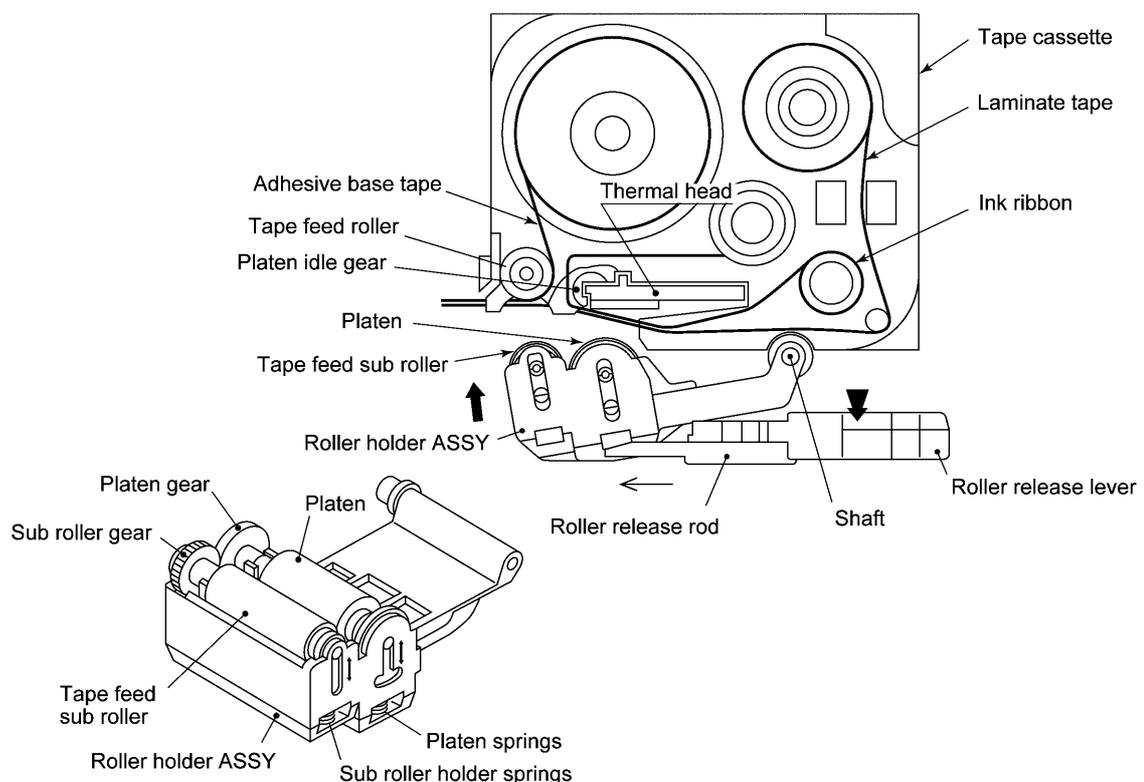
Roller Holder ASSY Setting & Retracting Mechanism
